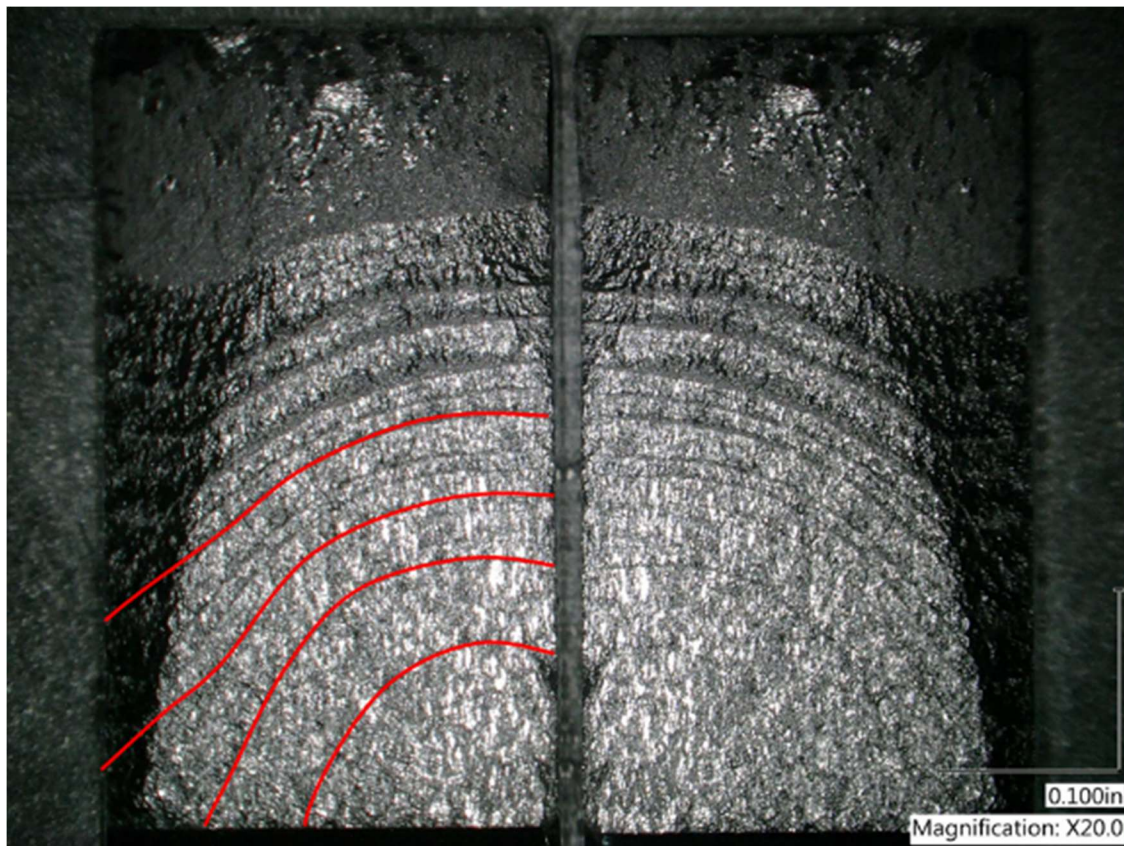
Specimen fracture surfaces with marker bands highlighted. Original image taken at 20X Matching fracture surfaces are shown side by side. The crack originated from the bottom center of the image and propagated upward and outward.
